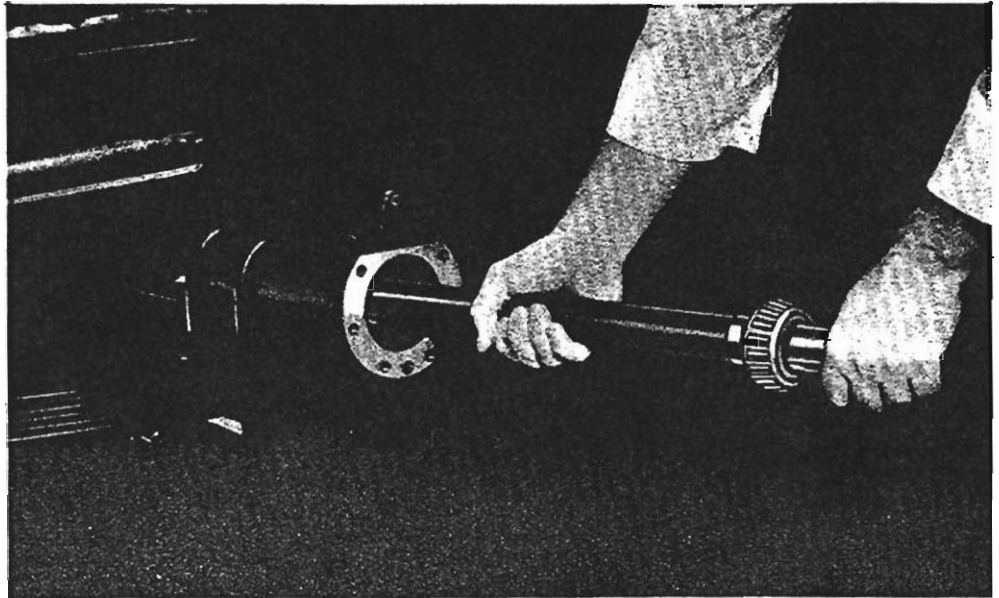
Removing Brake Drum and Hub Assembly Using Puller KMO-476. Do Not Use Knock-Off Type
